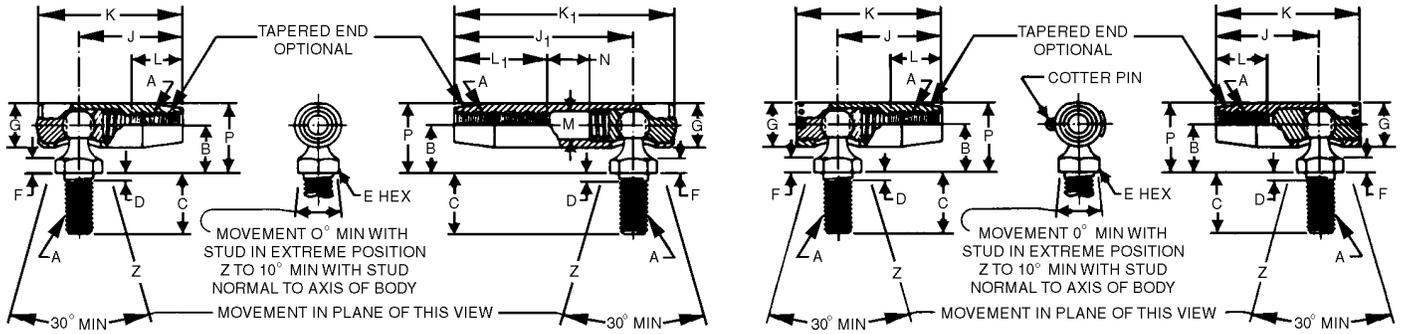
CRIMPED END PLUG WITH SPRING CONSTRUCTION—TYPE A
